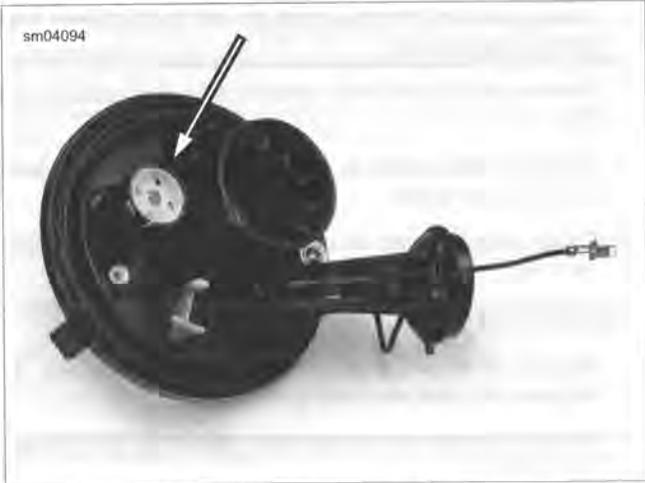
Fuel Tank Top Plate With Vapor Valve
